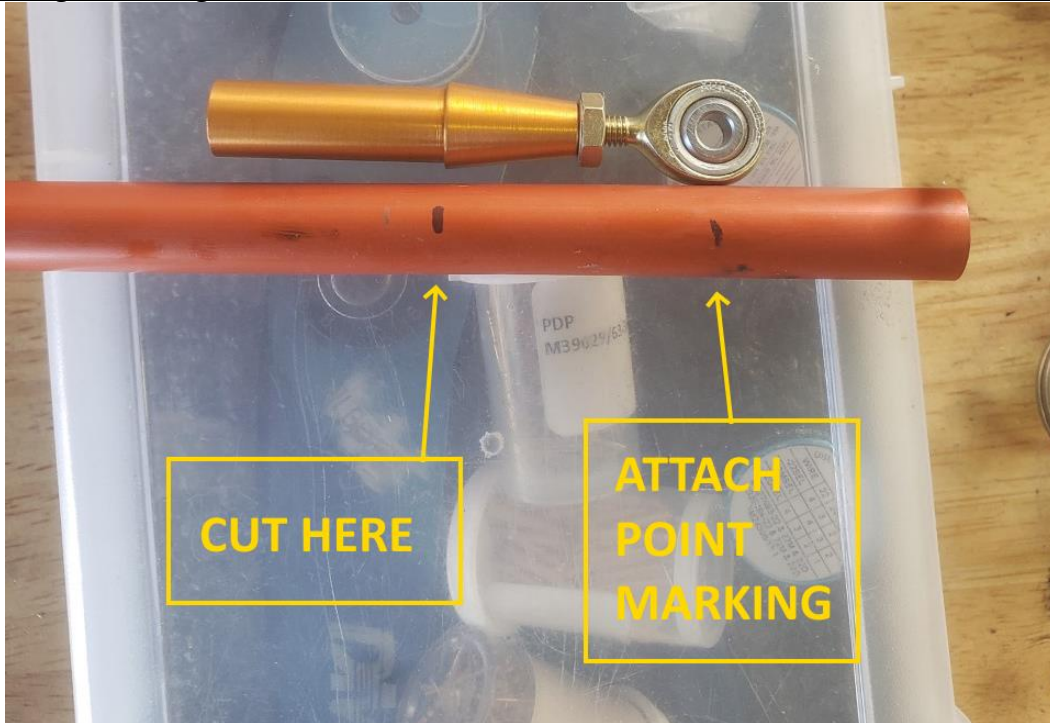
PUSH PULL TUBE TRIMMING
